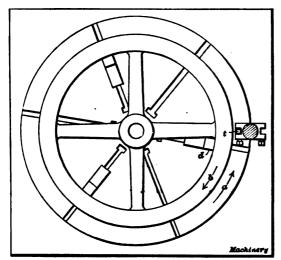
Plan View showing Flywheel Casting Chucked for Turning
